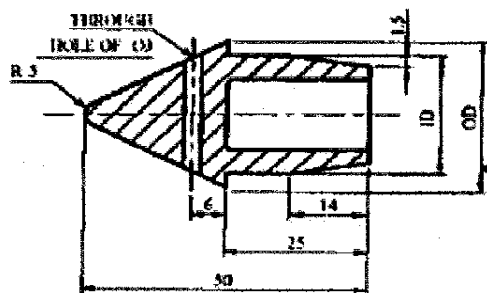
TYPICAL DRAWING OF CAP FOR TUBE END
